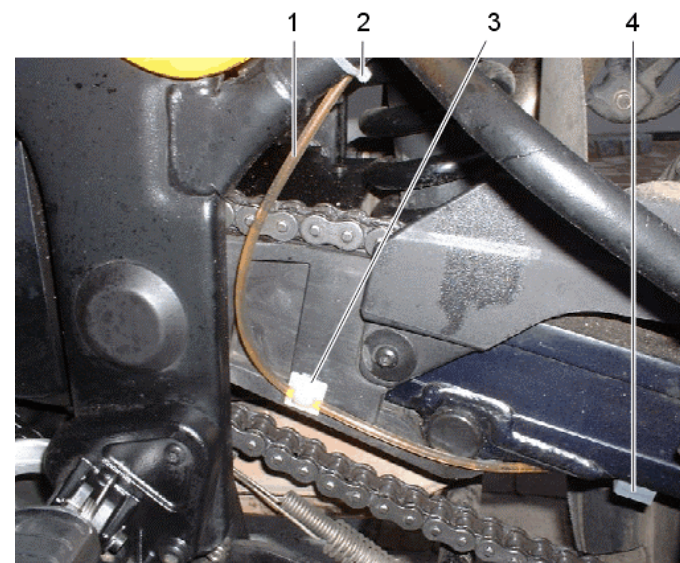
Fitting the Oil Tube (Routing the Oil Tube upwards)
